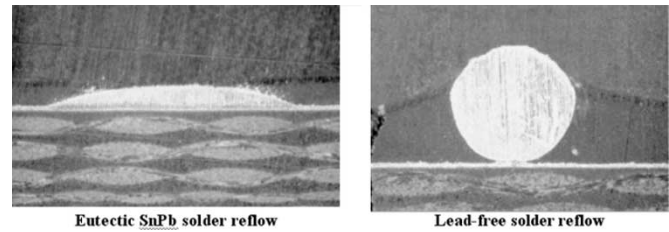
Wetting of the solder ball on copper sheet after reflow.
